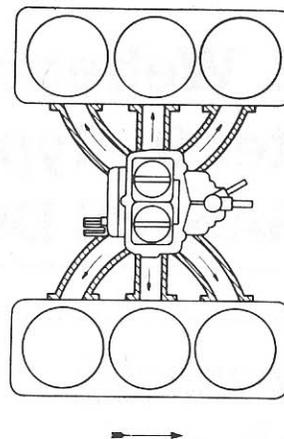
Single carburettor fitted to a six-cylinder V-engine (Sec 1)
